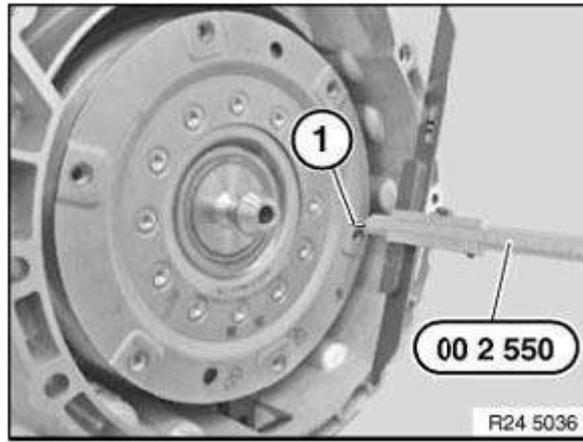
Measuring Distance Between Contact Surface And Threaded Hole Surface In Torque Converter
